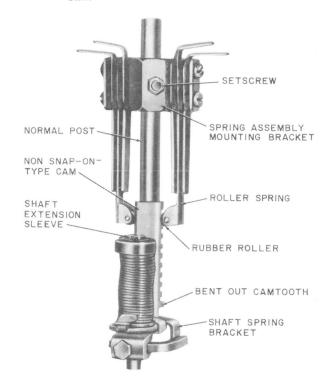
Normal Post Spring Assembly Having Rubber Rollers Operated by Nonsnap-On-Type Cam (Single Cam Illustrated)
